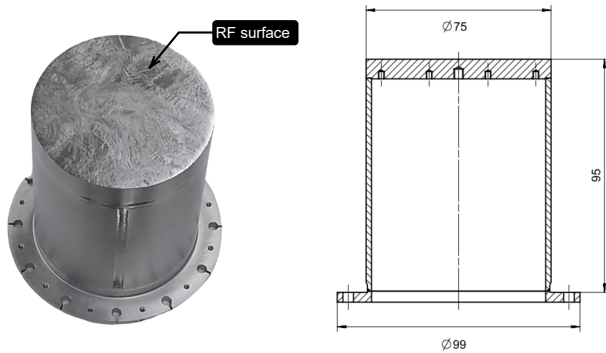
Left) Flat cylindrical QPR sample, with the RF surface ideally being the only part exposed to the electromagnetic field. Right) Cross-sectional view of a QPR sample, with units indicated in millimetres.
